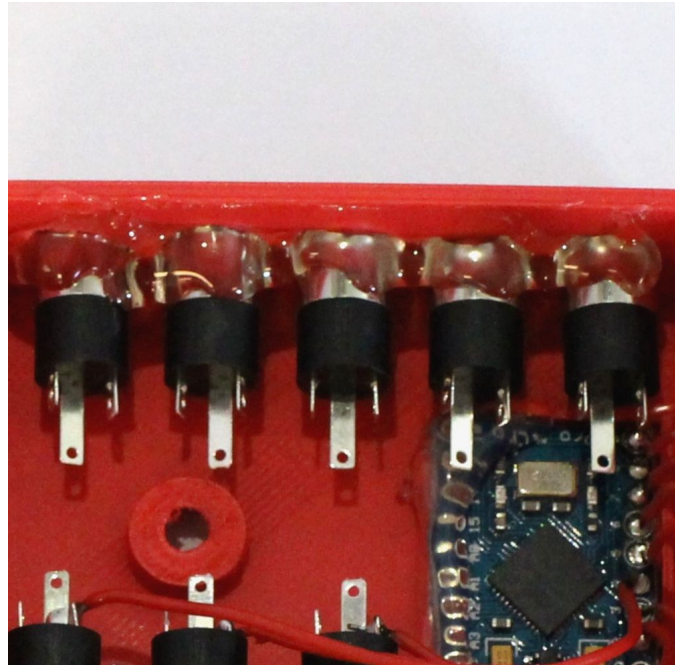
Hot glue fixes the jack sockets 5-8 in the FAB1 box
